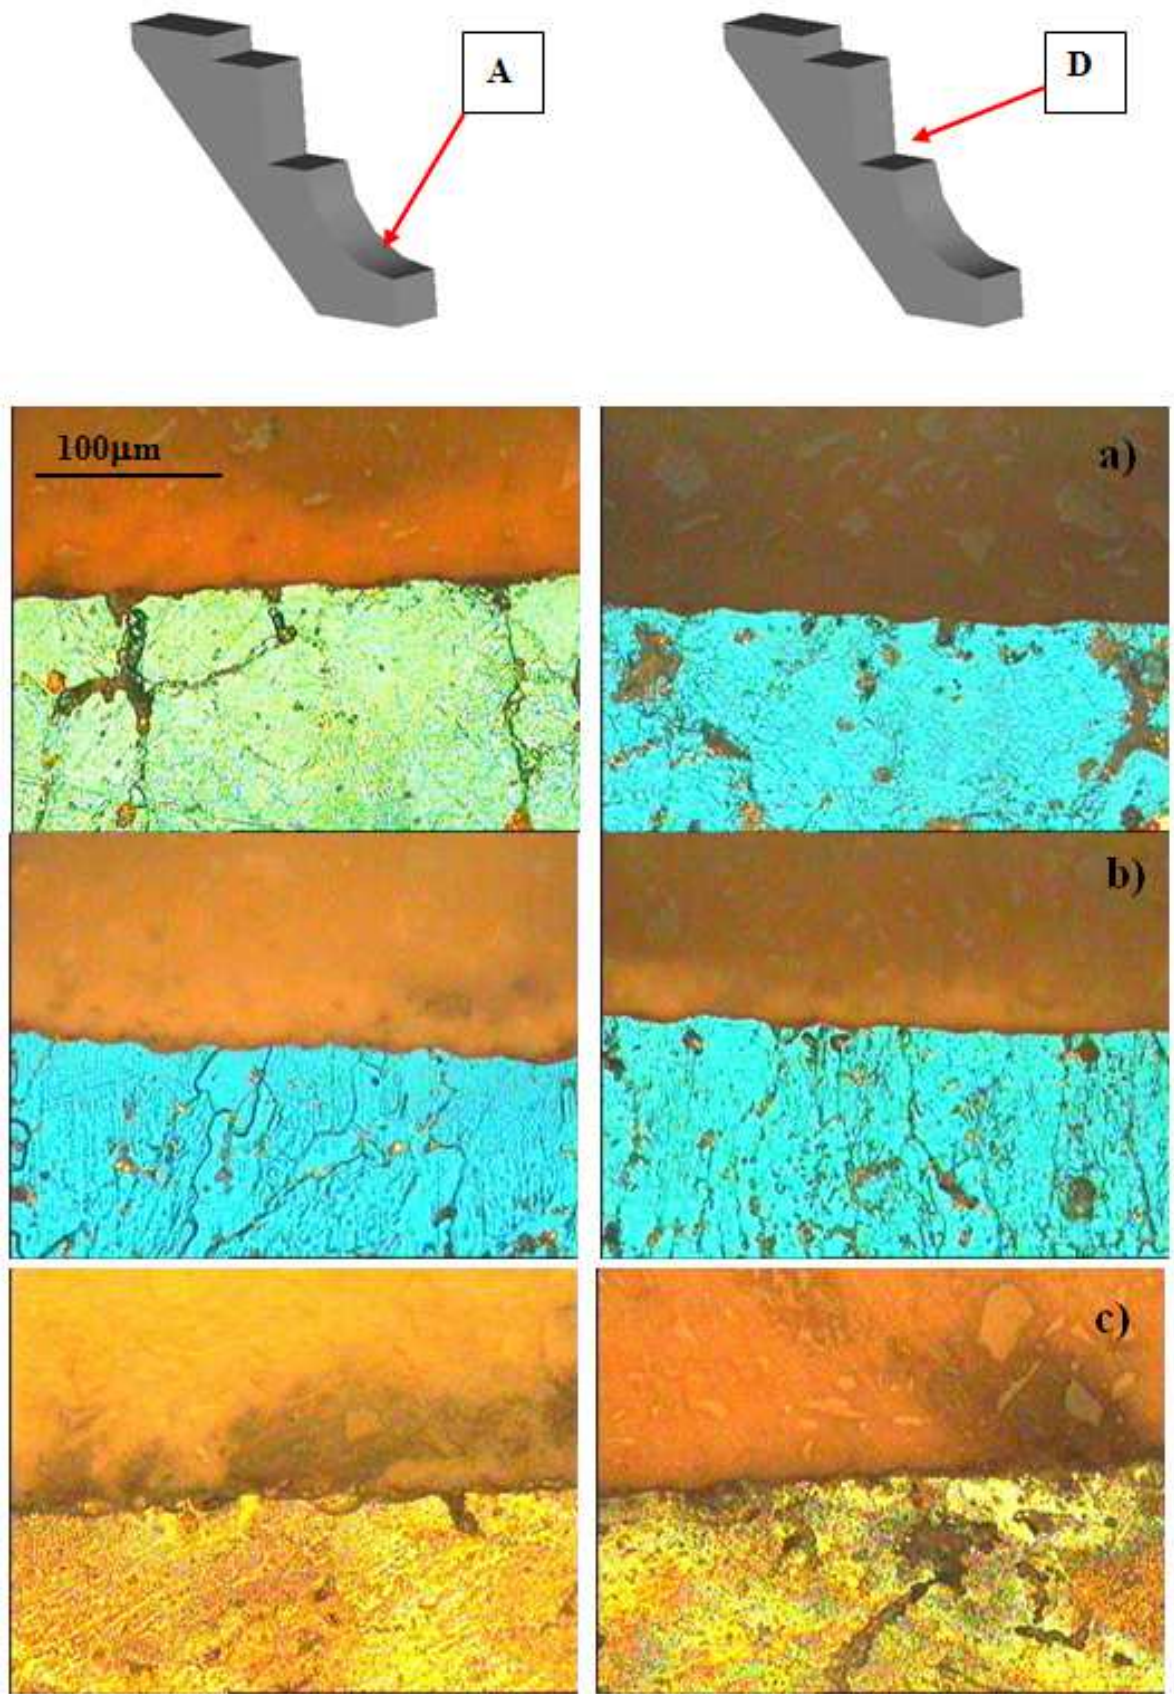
Etched sections of finished workpieces: a) Al 7075, b) Al 7050, c)Al 2219
